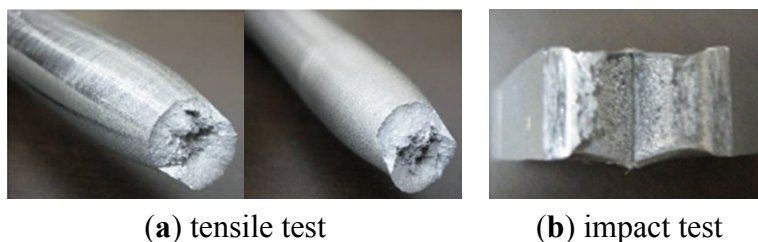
Fracture surface of specimens of tensile test and impact test. (a) tensile test; (b) impact test
